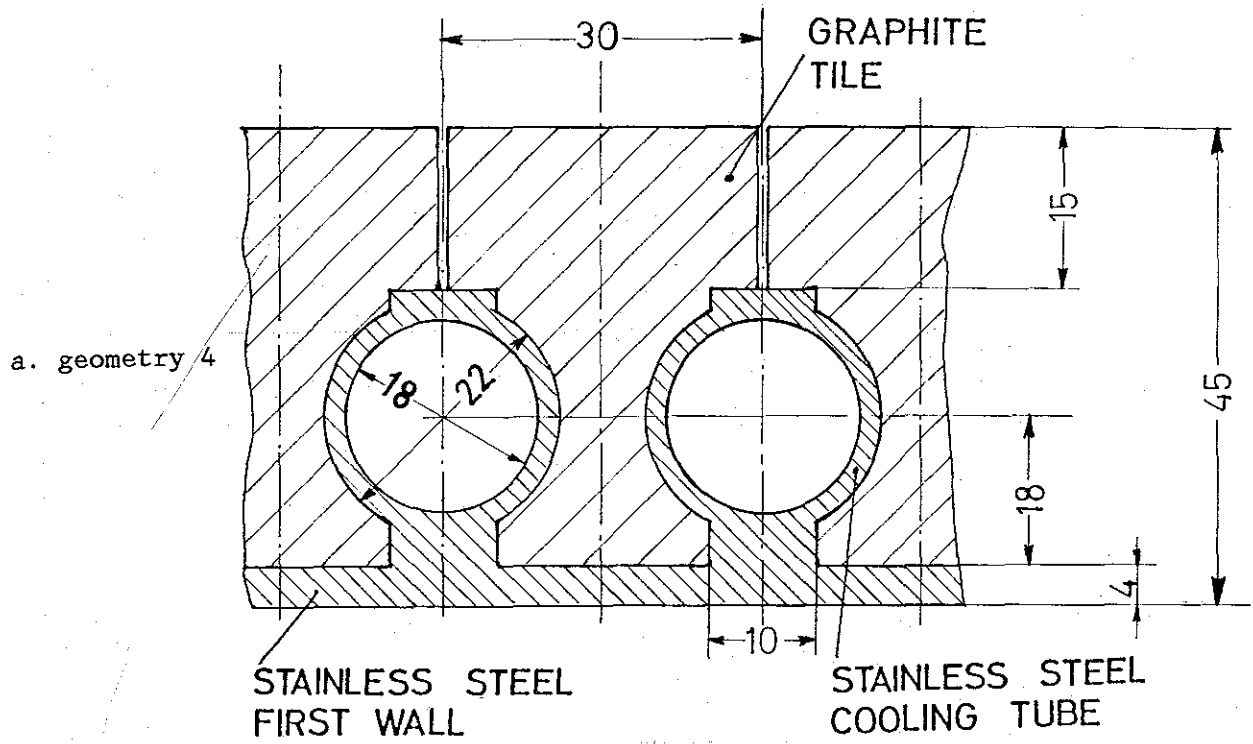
First wall designs with the tubes welded outside the canisters (dimensions in millimeters).
